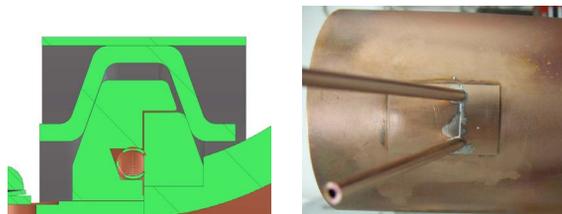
Left: the lip at the coupler flange; right: Slot welding test.
